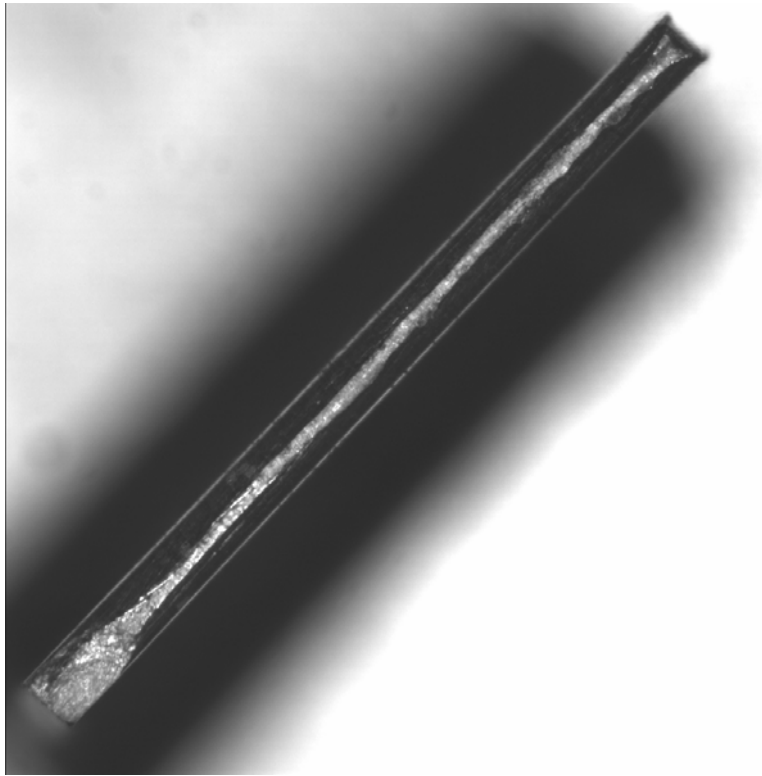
Fracture Surface of Specimen 5772.
